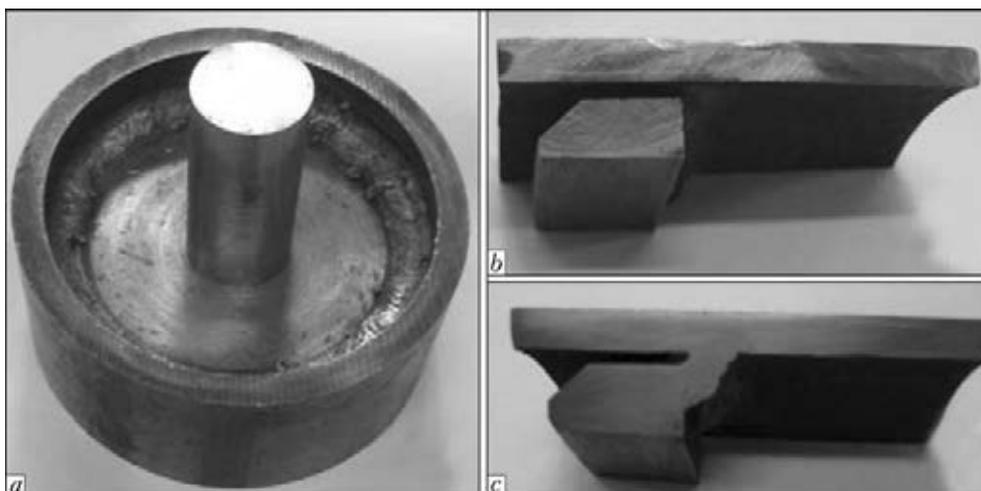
Results of welding the cap to pipe inner surface: *a* – circumferential weld with overlapping; *b* – actual gap between the cap and pipe; *c* – welded joint shape
